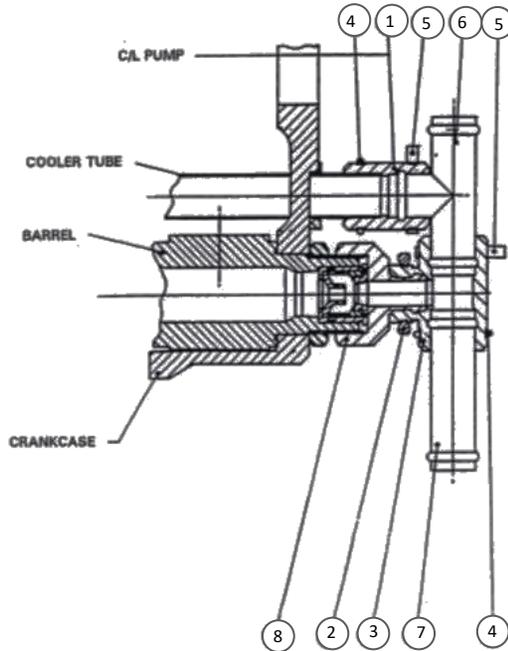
'P' Type and High Lift Pump- Inlet Manifold Assembly
